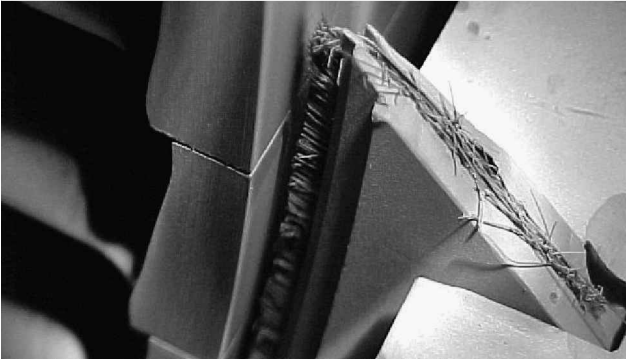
Horizontal-joint view of brush seals above the buckets tips; design has been improved to eliminate bristles being caught between segments.
